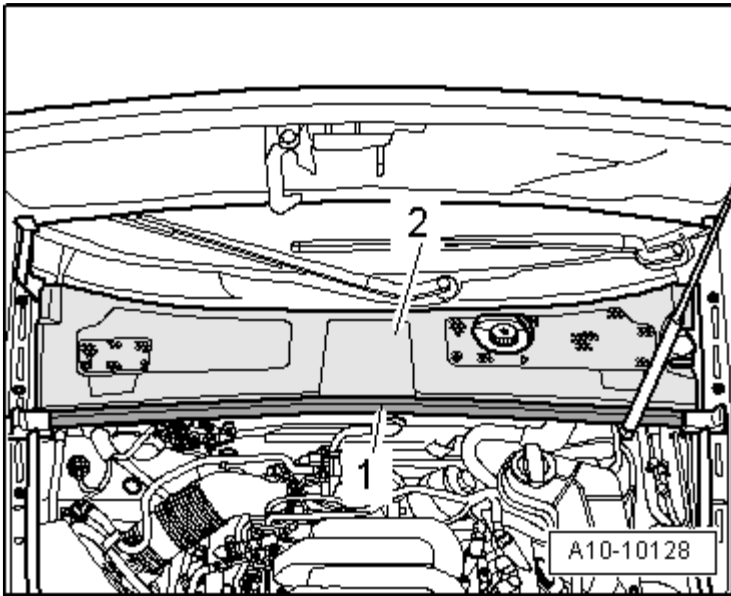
Removing Rubber Seal And Plenum Chamber Cover
